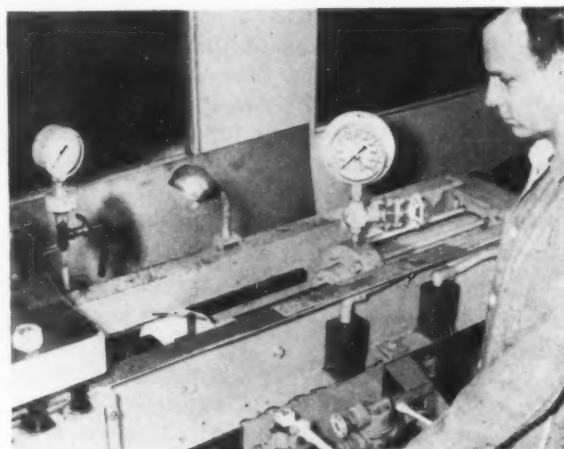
Wedge draw machine ready for test. Sample is in die at the left.
